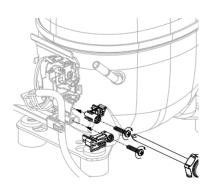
Step 5 - Insert and screw the cable clip and complete electrical cables fastening
